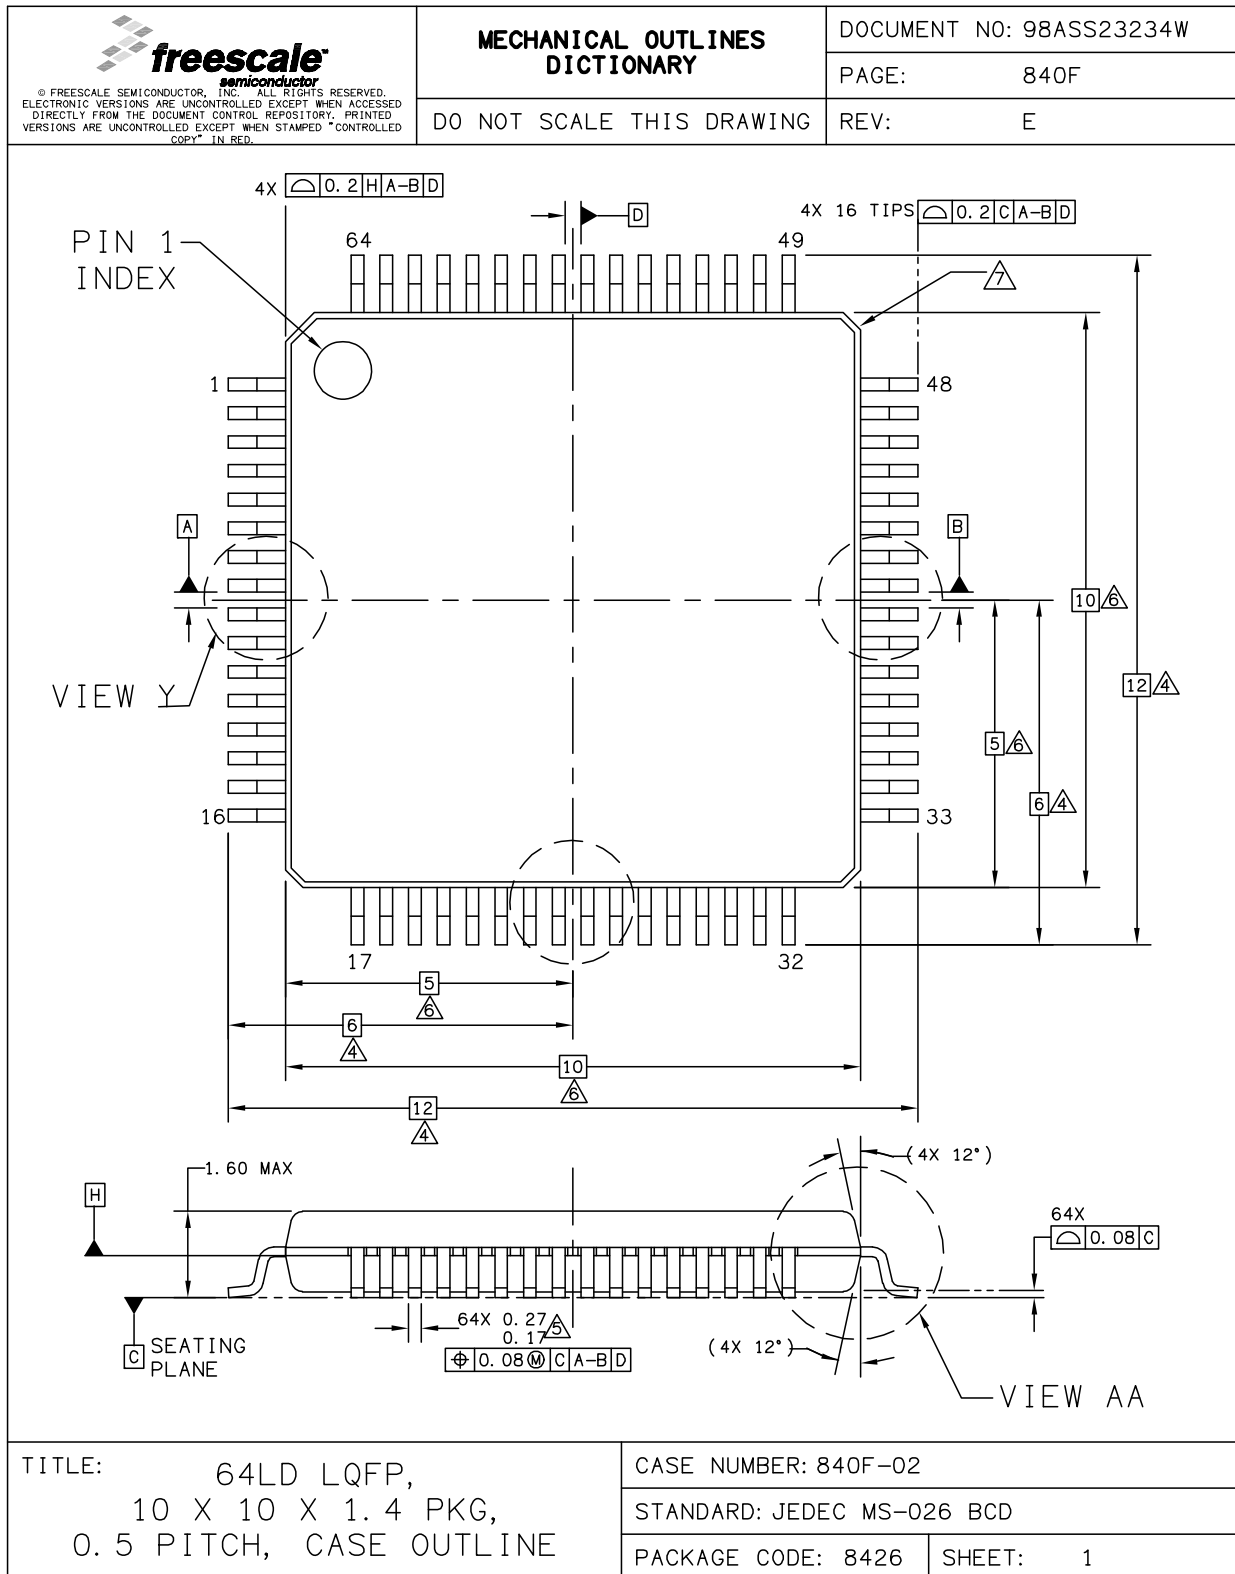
64 LQFP package mechanical drawing (1 of 3)
